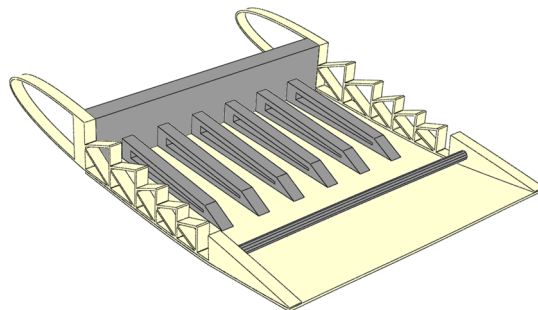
CAD model of camber morphing wing section with cantilevers.
